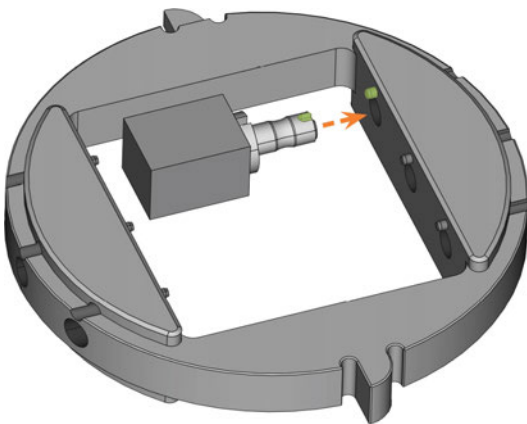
INSERTING A BLOCK INTO THE BLOCK HOLDER (HERE SHOWN FROM BELOW; GROOVE AND POSITIONING PIN MARKED GREEN)
